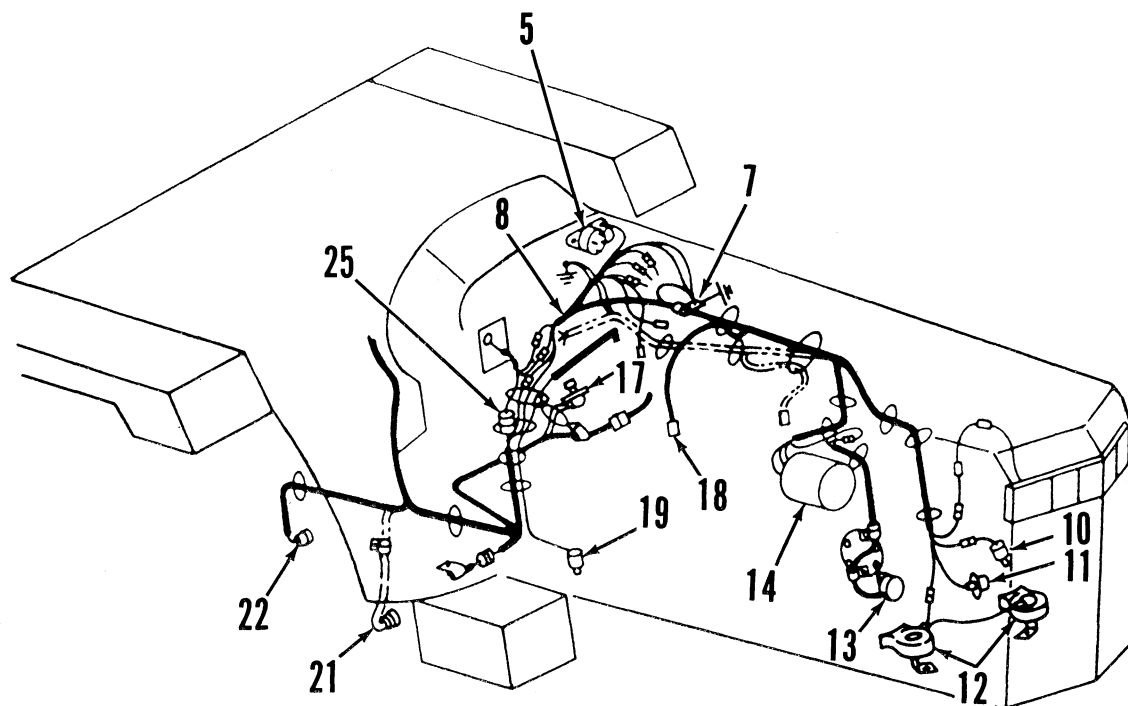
Wiring harness diagram showing components located on right side of tractor equipped with gage cluster and analog tachometer. Refer to Fig. 292 legend except for 19-pin connector (25).
